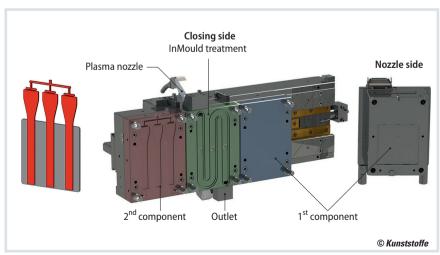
Two-component overmolding tool with adapted plasma nozzle for the production of three hard/soft peel test specimens (source: Kunststofftechnik Paderborn)
